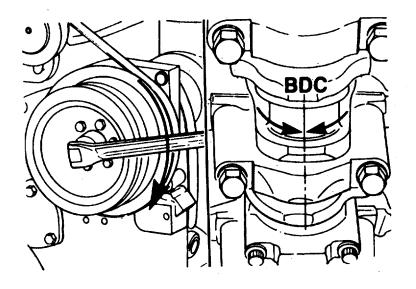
Rotating Crankshaft to Bottom Dead Center (BDC).
